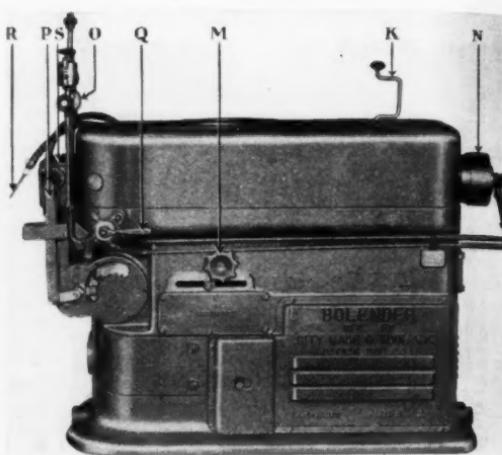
Bolender No. 2 Gear Burnisher, for Larger Gears.
